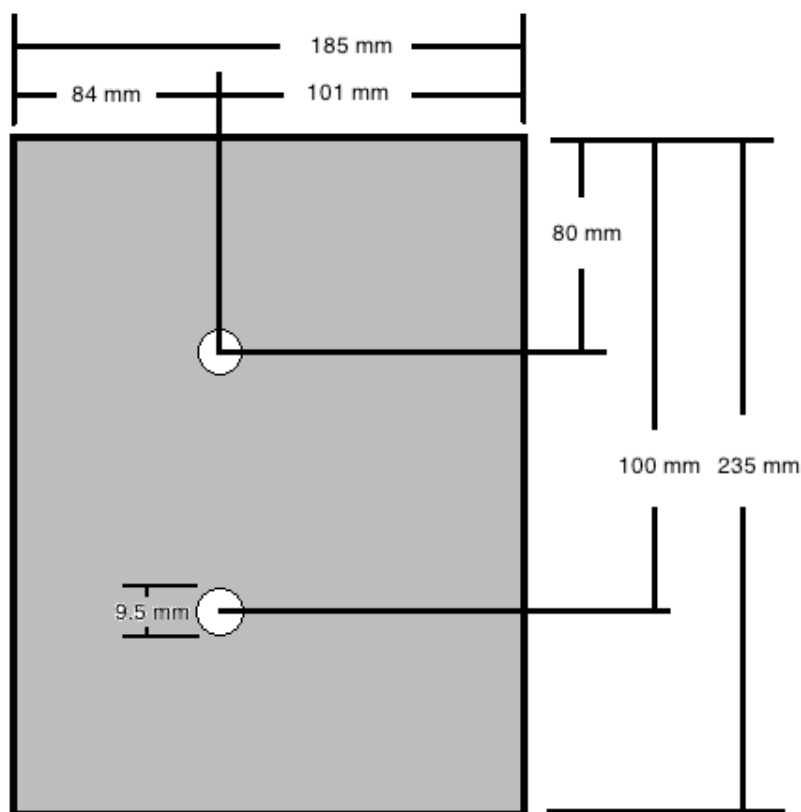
Panel Dimension and Hole Location for Mounting on the Sea Spider
